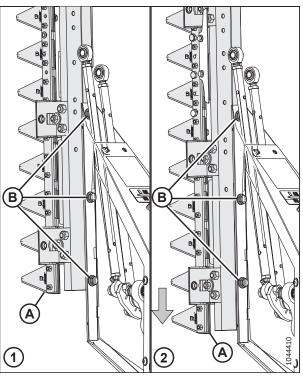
Adjusting Knife Position1 - Windrower Configuration2 - Combine Configuration
